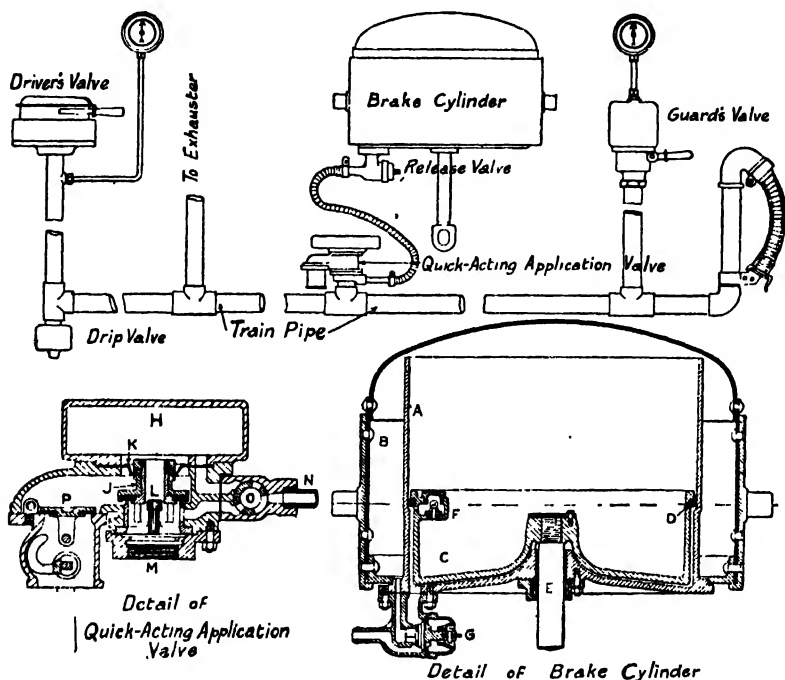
General Arrangement of Essential Parts of Vacuum Brake (Vacuum Brake Co.).
